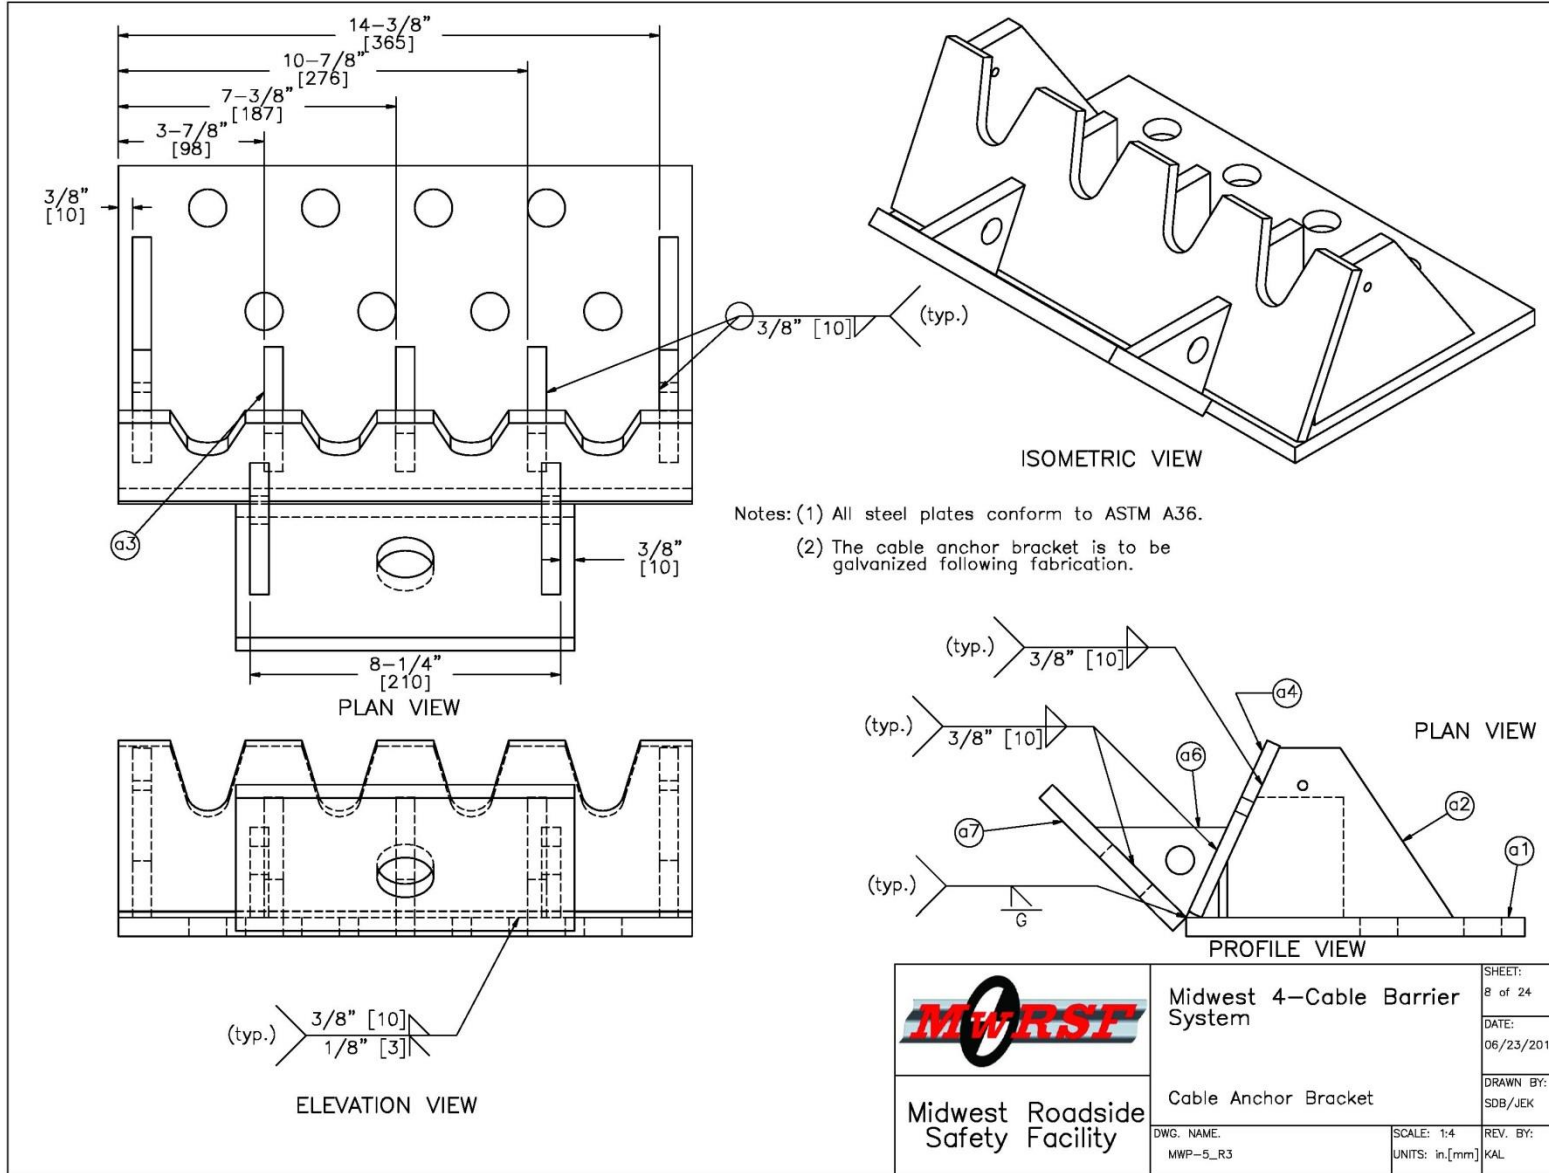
Cable Anchor Bracket, Test No. MWP-6
